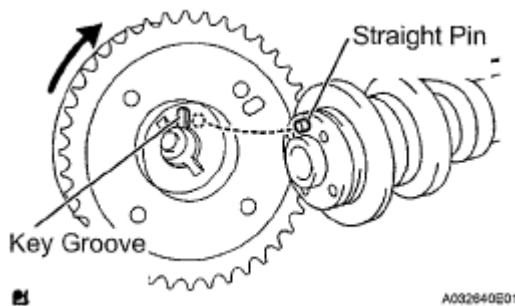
Putting Camshaft Timing Gear And Camshaft Together With Straight Pin And Key Groove Misaligned
